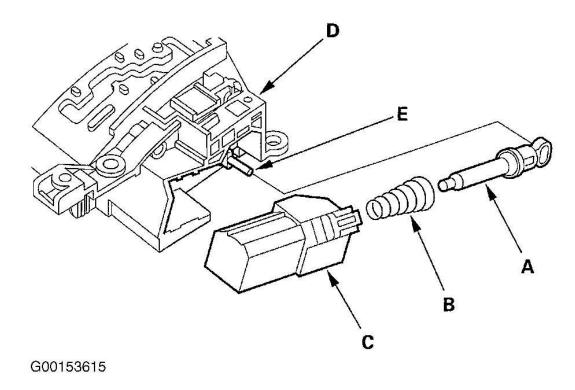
Removing Shift Lock Solenoid Courtesy of AMERICAN HONDA MOTOR CO., INC.
